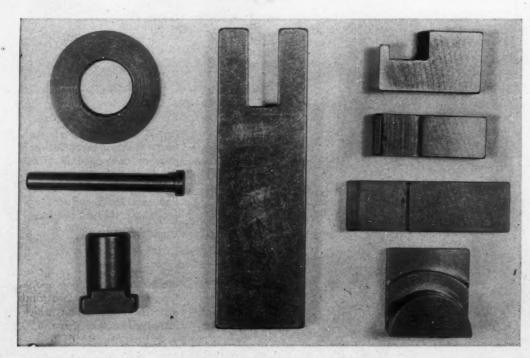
Left—Large link, key block, pins and blanks for production tools barrel finished to obtain uniform radii
